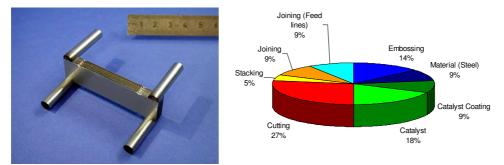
Microstructured heat-exchanger produced by embossing and laser welding
